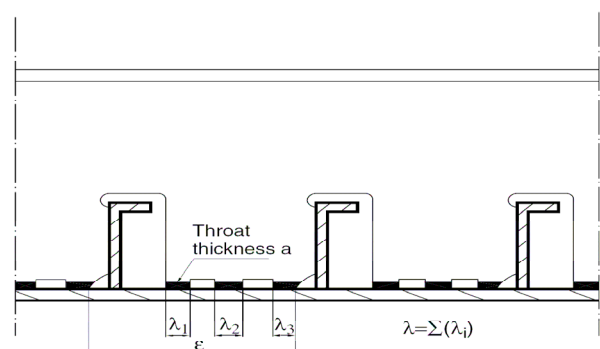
Intermittent scallop fillet welding between cut-outs
